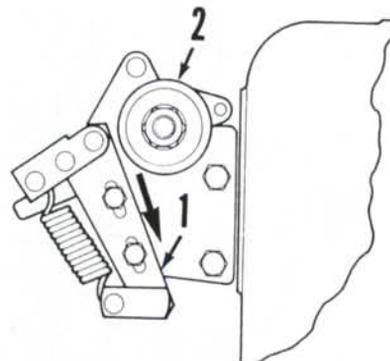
View of control linkage spring carrier (1) and friction lever (2). Refer to text for adjustment procedure.
